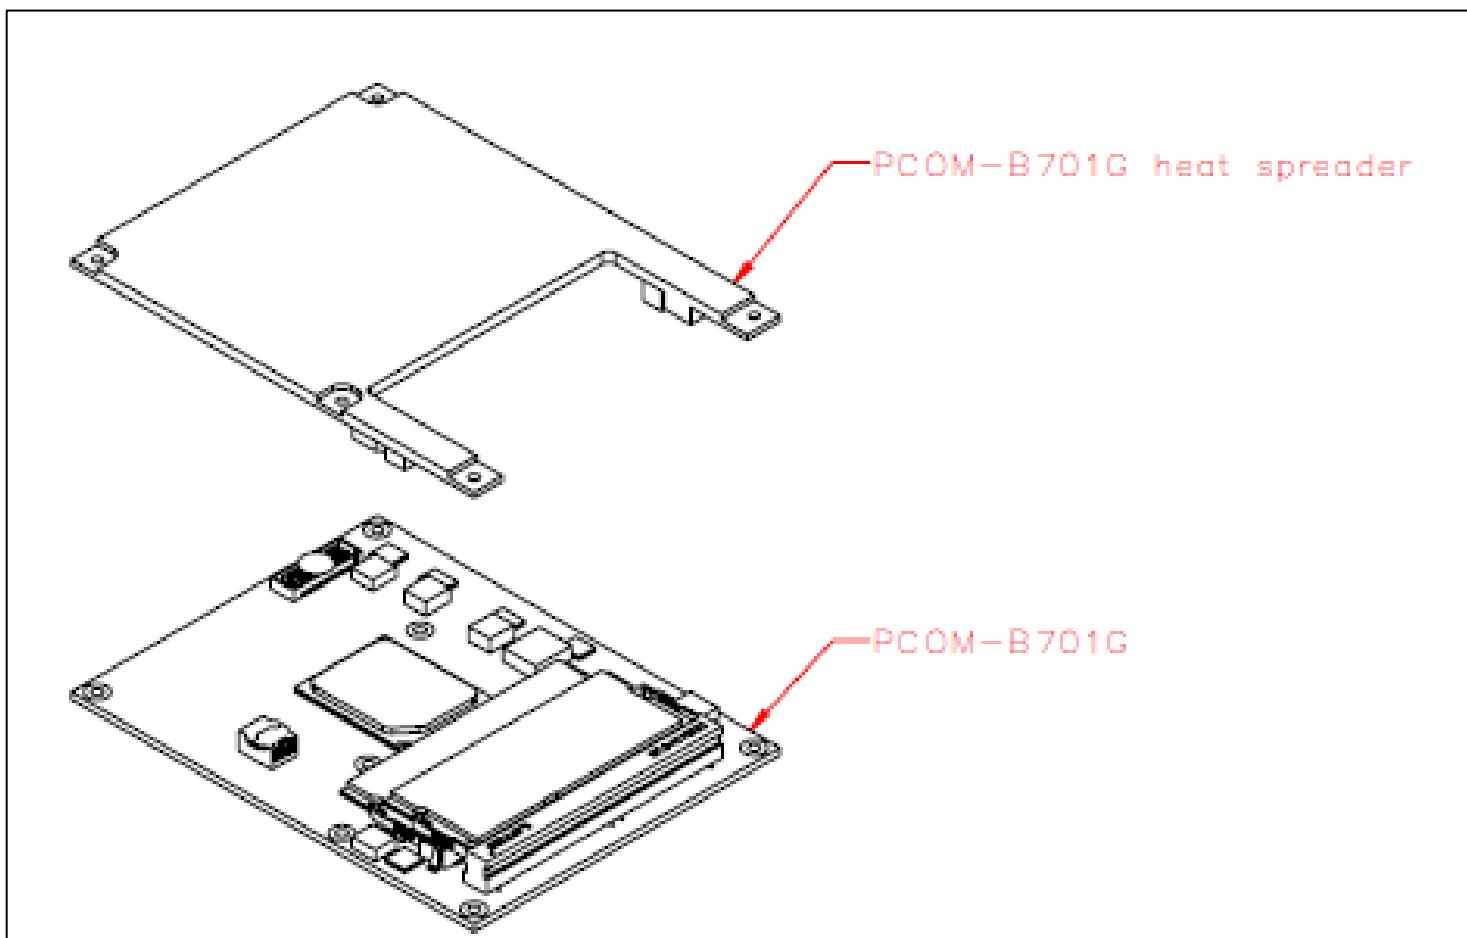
PCOM-B701GT Heat Spreader Assembly Guide
